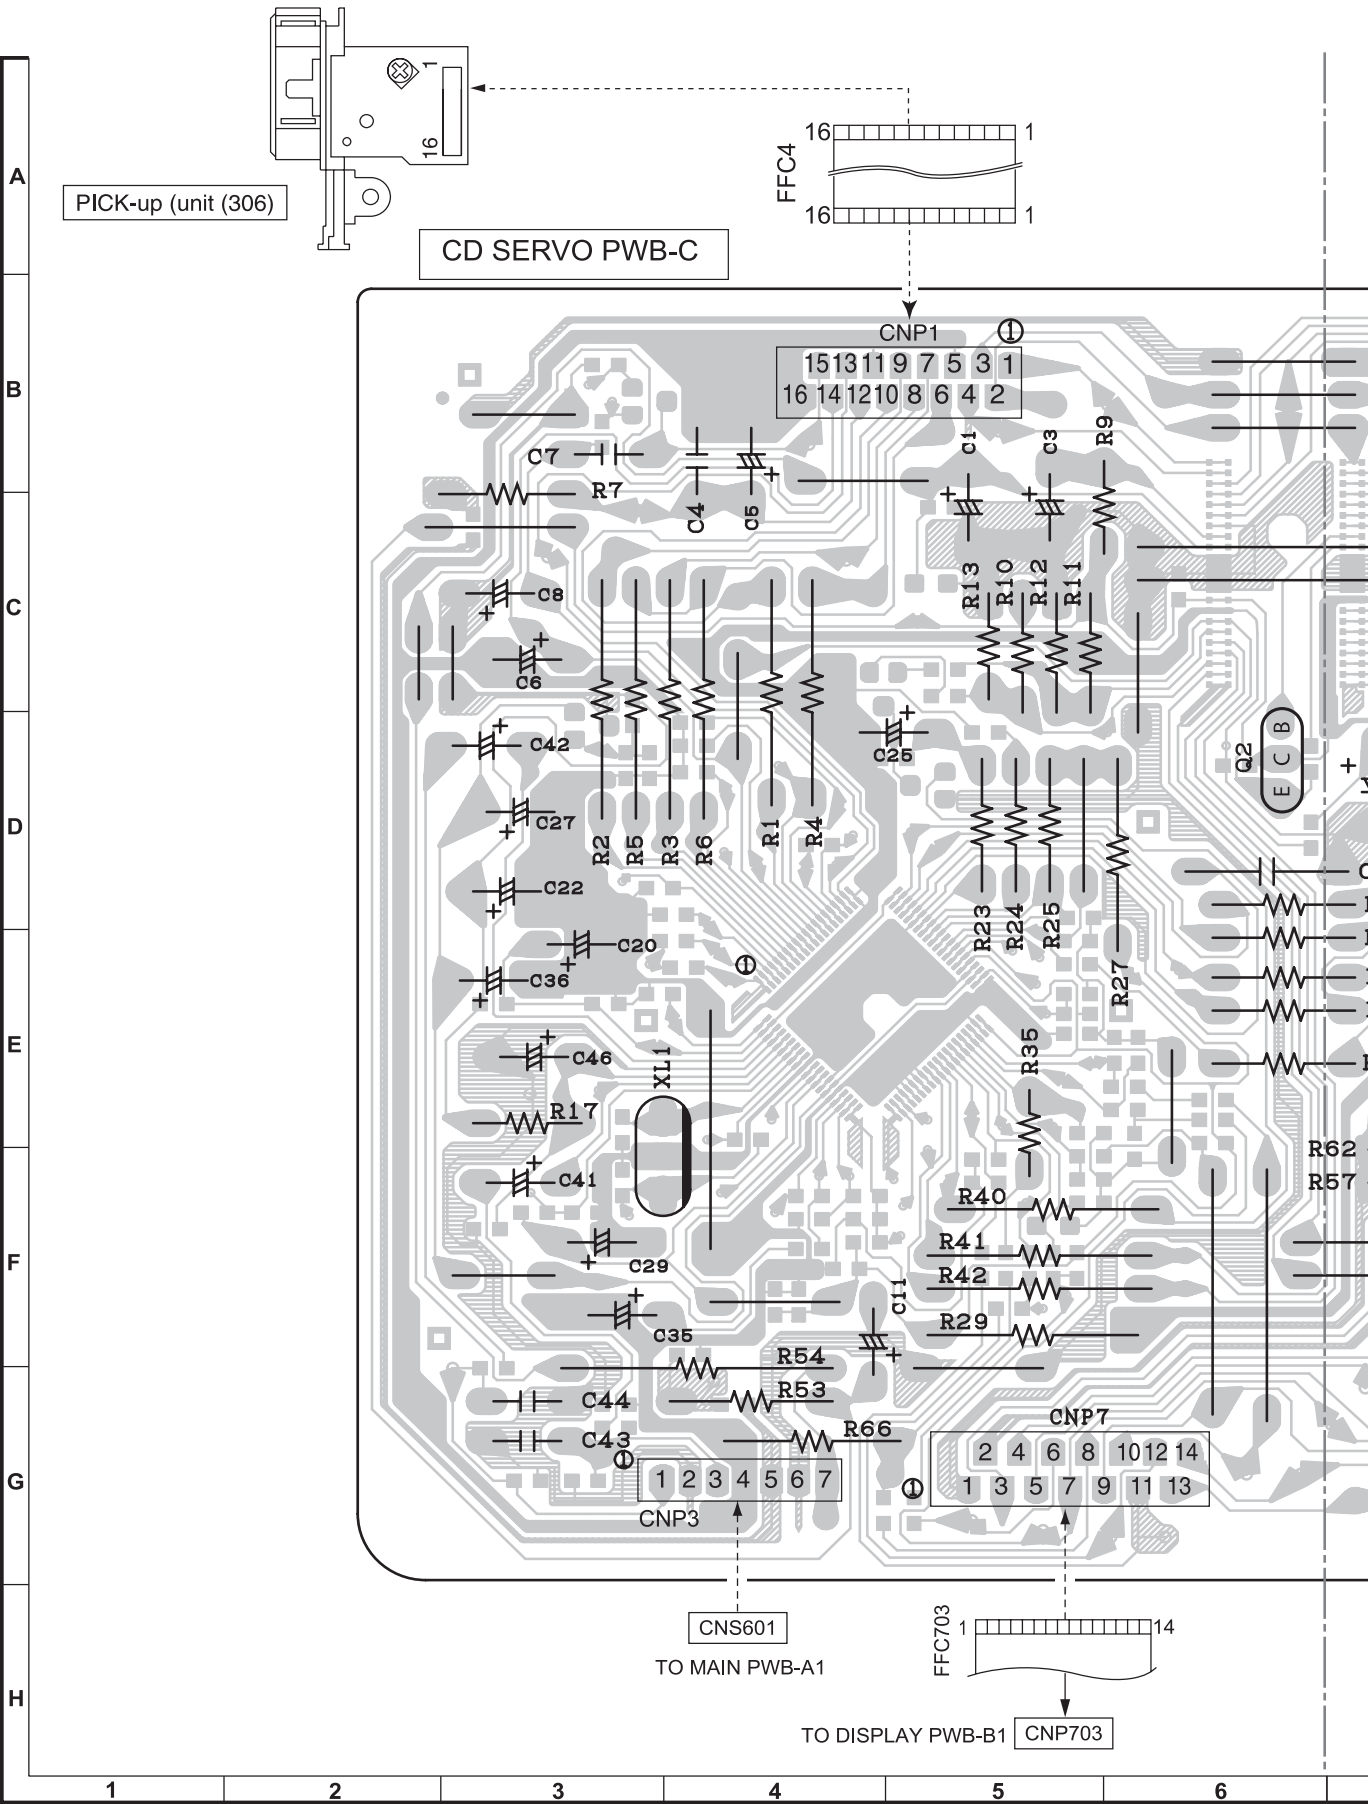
WIRING SIDE OF PWB (TOP VIEW) (12/15)
